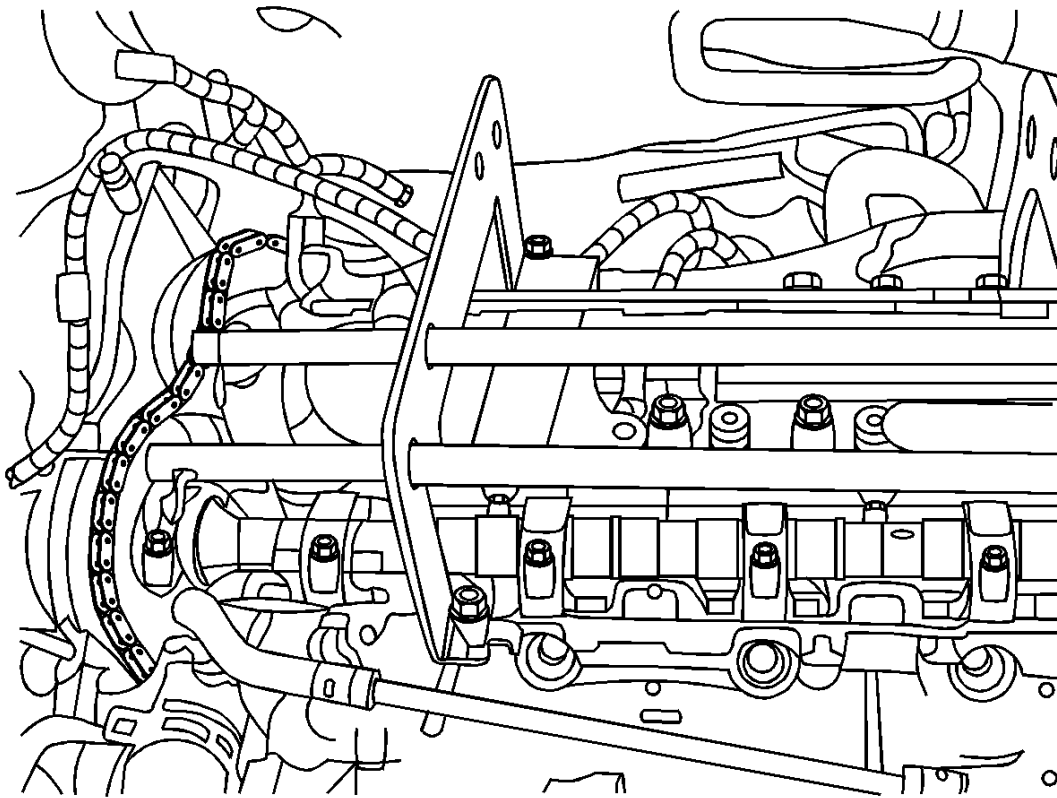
View Of J 43649 Valve Spring Compressor (Second Camshaft Cover Bolt Hole)
